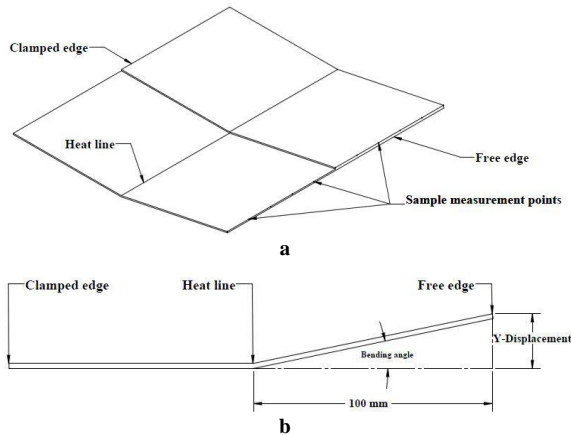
Schematic shape of laser formed tailor machined blank, a- Clamped edge, free edge, heat line and sample measurement points, b- Calculation of bending angle from displacement
